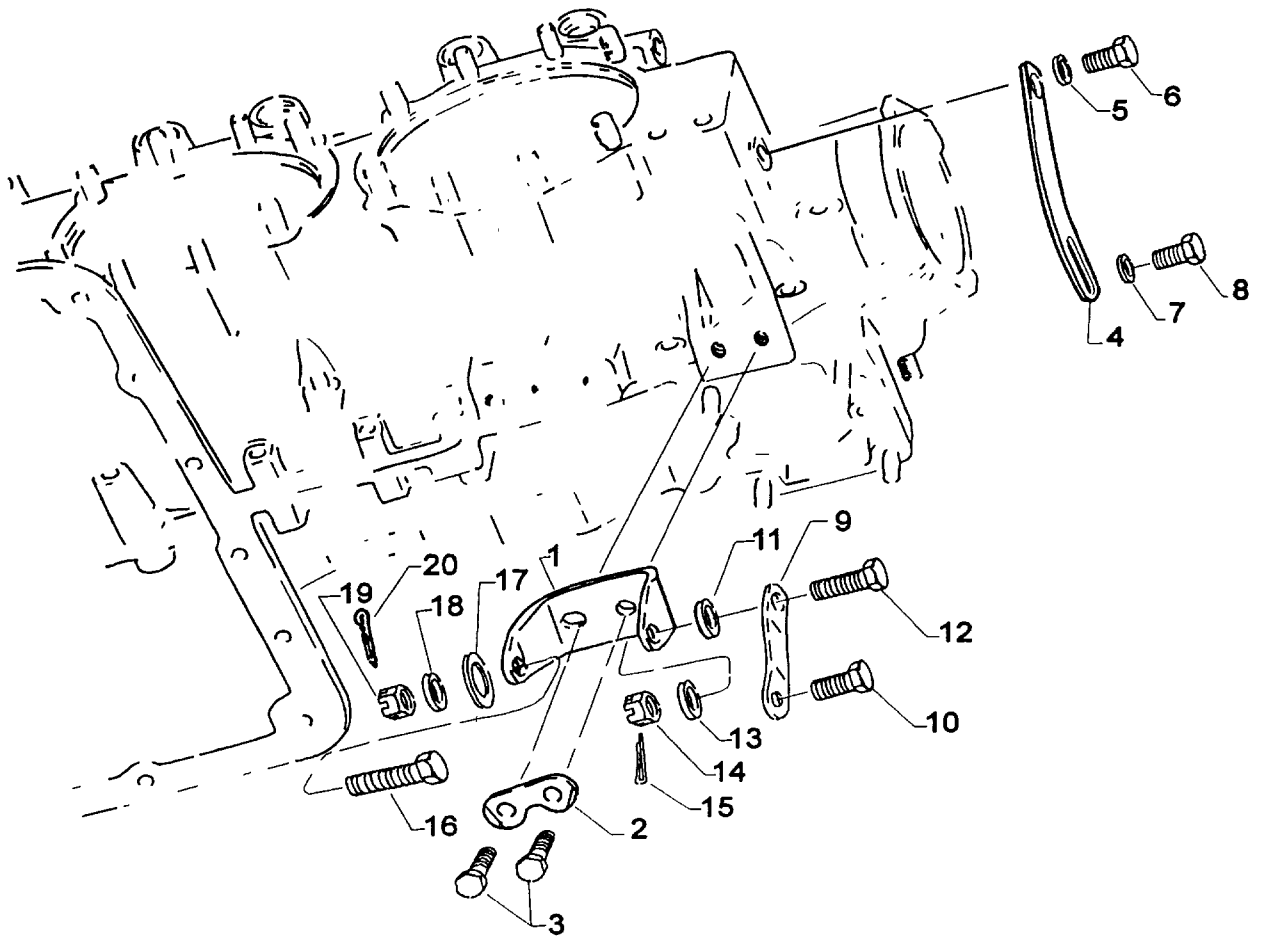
ALTERNATOR MOUNTING AND ATTACHING PARTS
